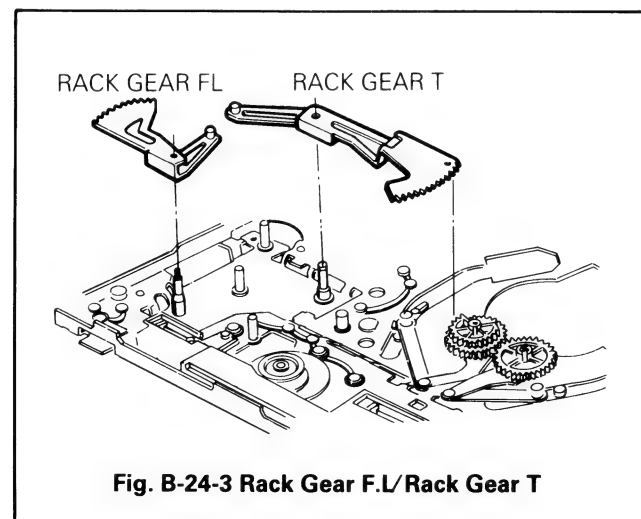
Rack Gear F.L/Rack Gear T
